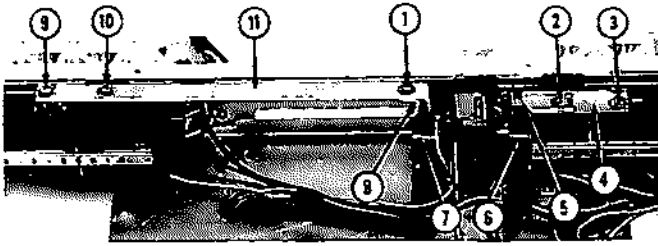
CONNECTOR LINK ADJUSTMENT - 2610
